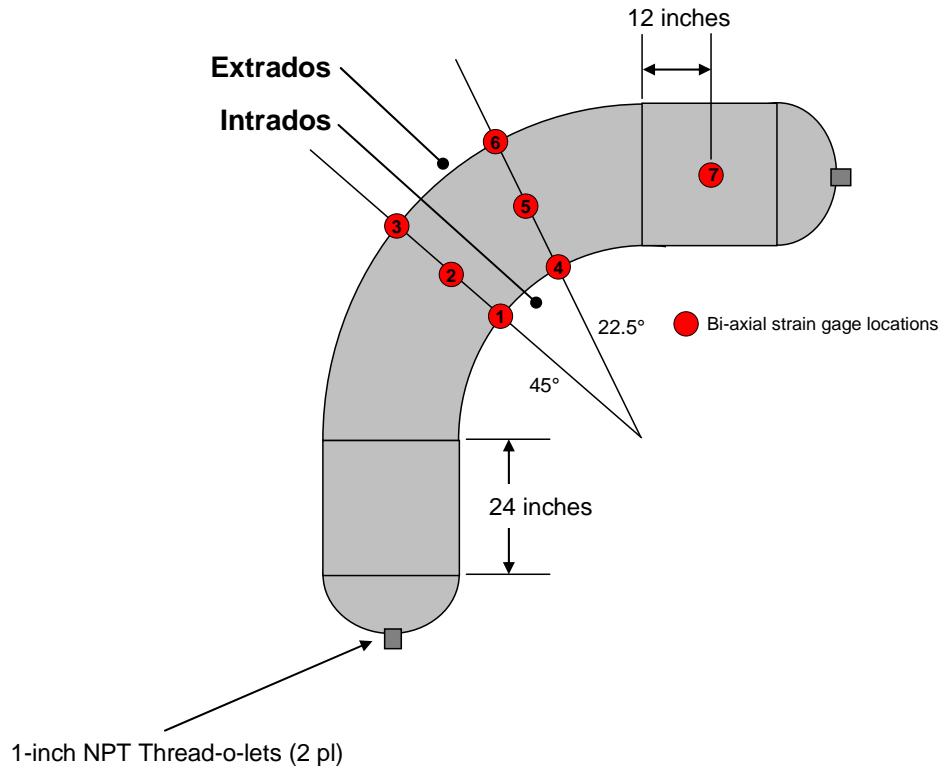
Strain gage locations on welded elbow assembly
